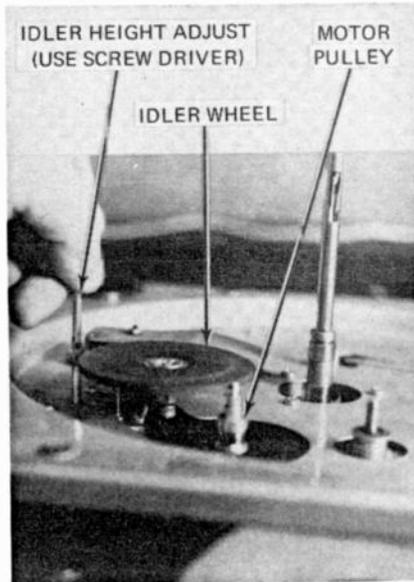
IDLER WHEEL HEIGHT must be set properly to insure that the motor pulley mates properly.
